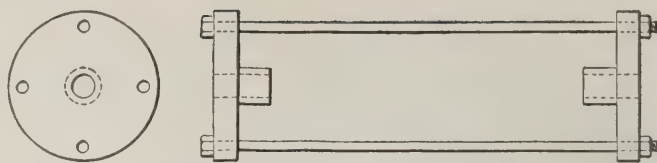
CLAMP FOR HOLDING ARMATURE WHILE SHAFT IS REMOVED
